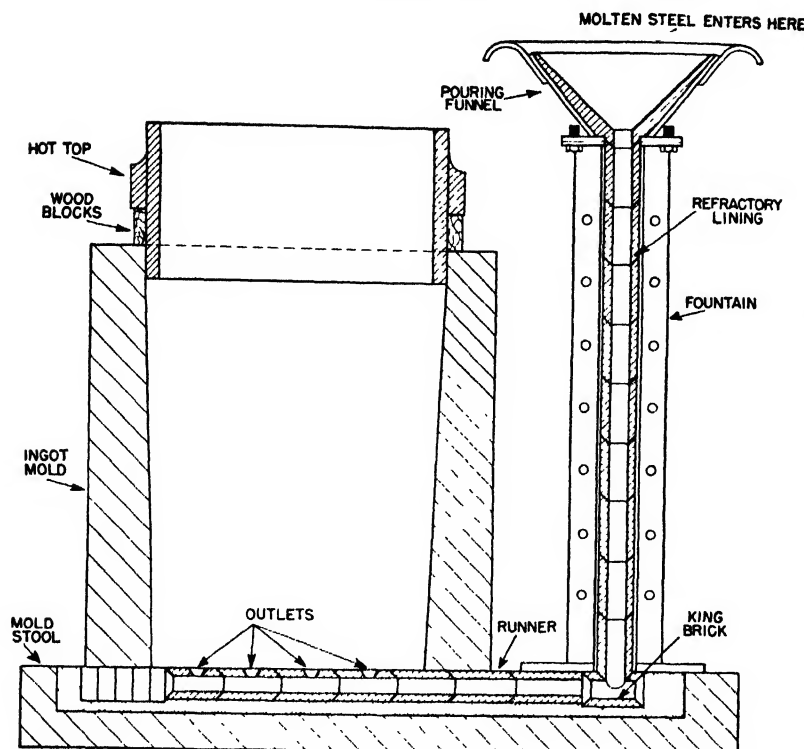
Schematic arrangement and nomenclature of parts of a mold assembly for bottom pouring.
